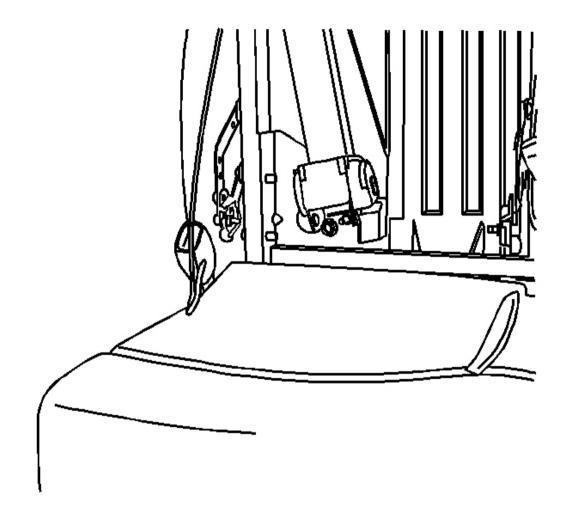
Seat Belt Retractor Nut Courtesy of GENERAL MOTORS CORP.
